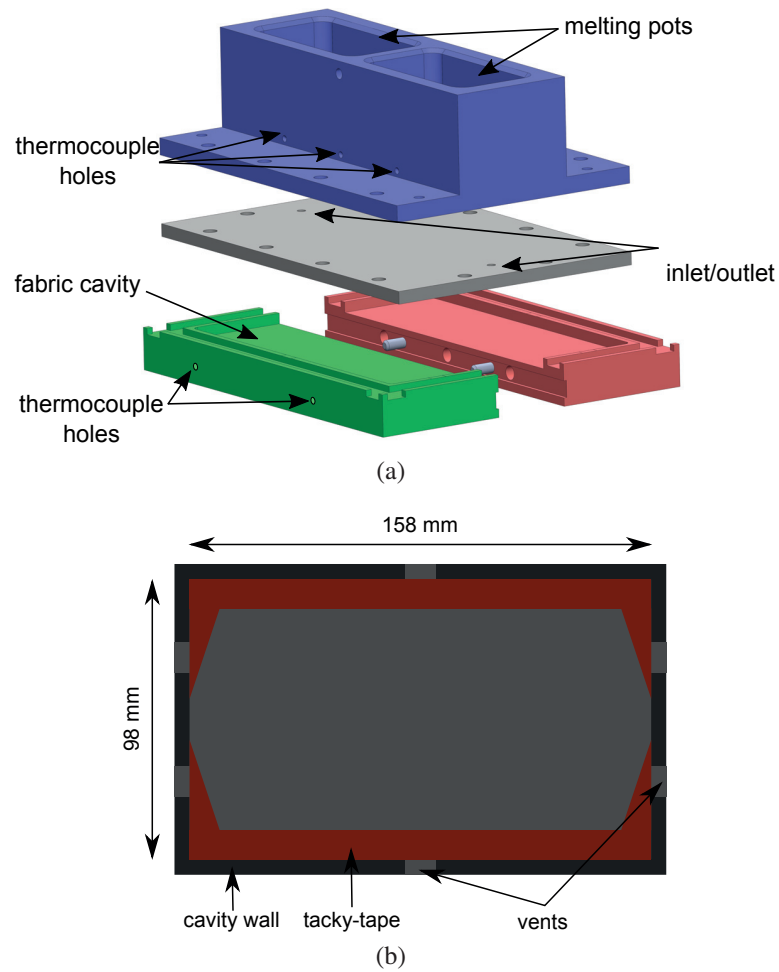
(a) Mold assembly and (b) top-view of the fabric cavity.
